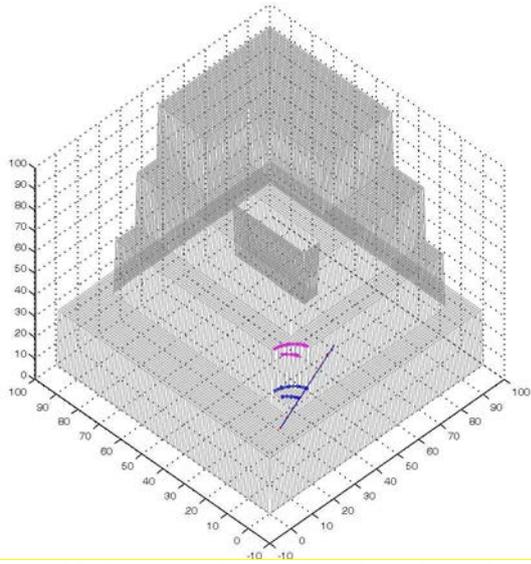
Bottom and top contact lines formed in two consequent tool rotations at the beginning of tool path segment
